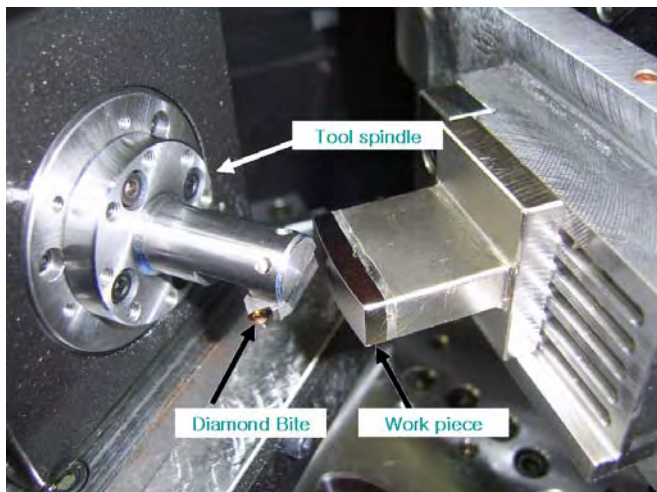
Setup for fly cutting(diamond bite and Al work piece) with 45° between tool spindle and work piece
